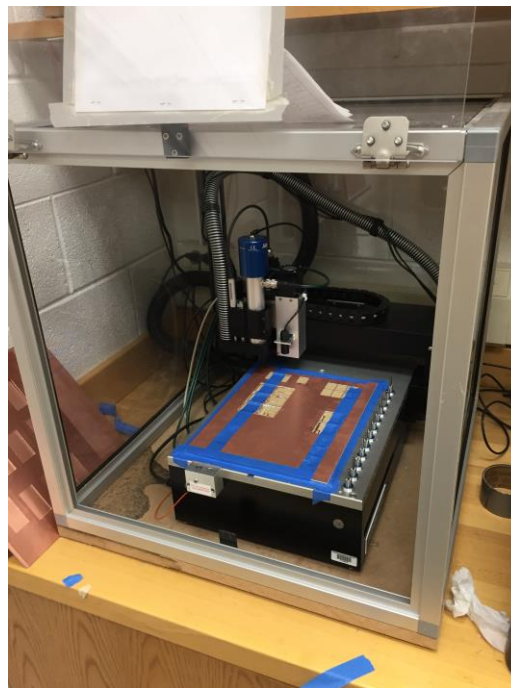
Milling machine for printed circuits board (PCB) circuit fabrication.
